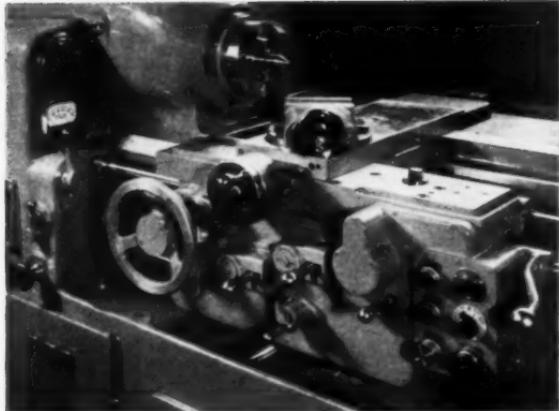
Operator's controls for 13-inch precision toolmakers lathe.
